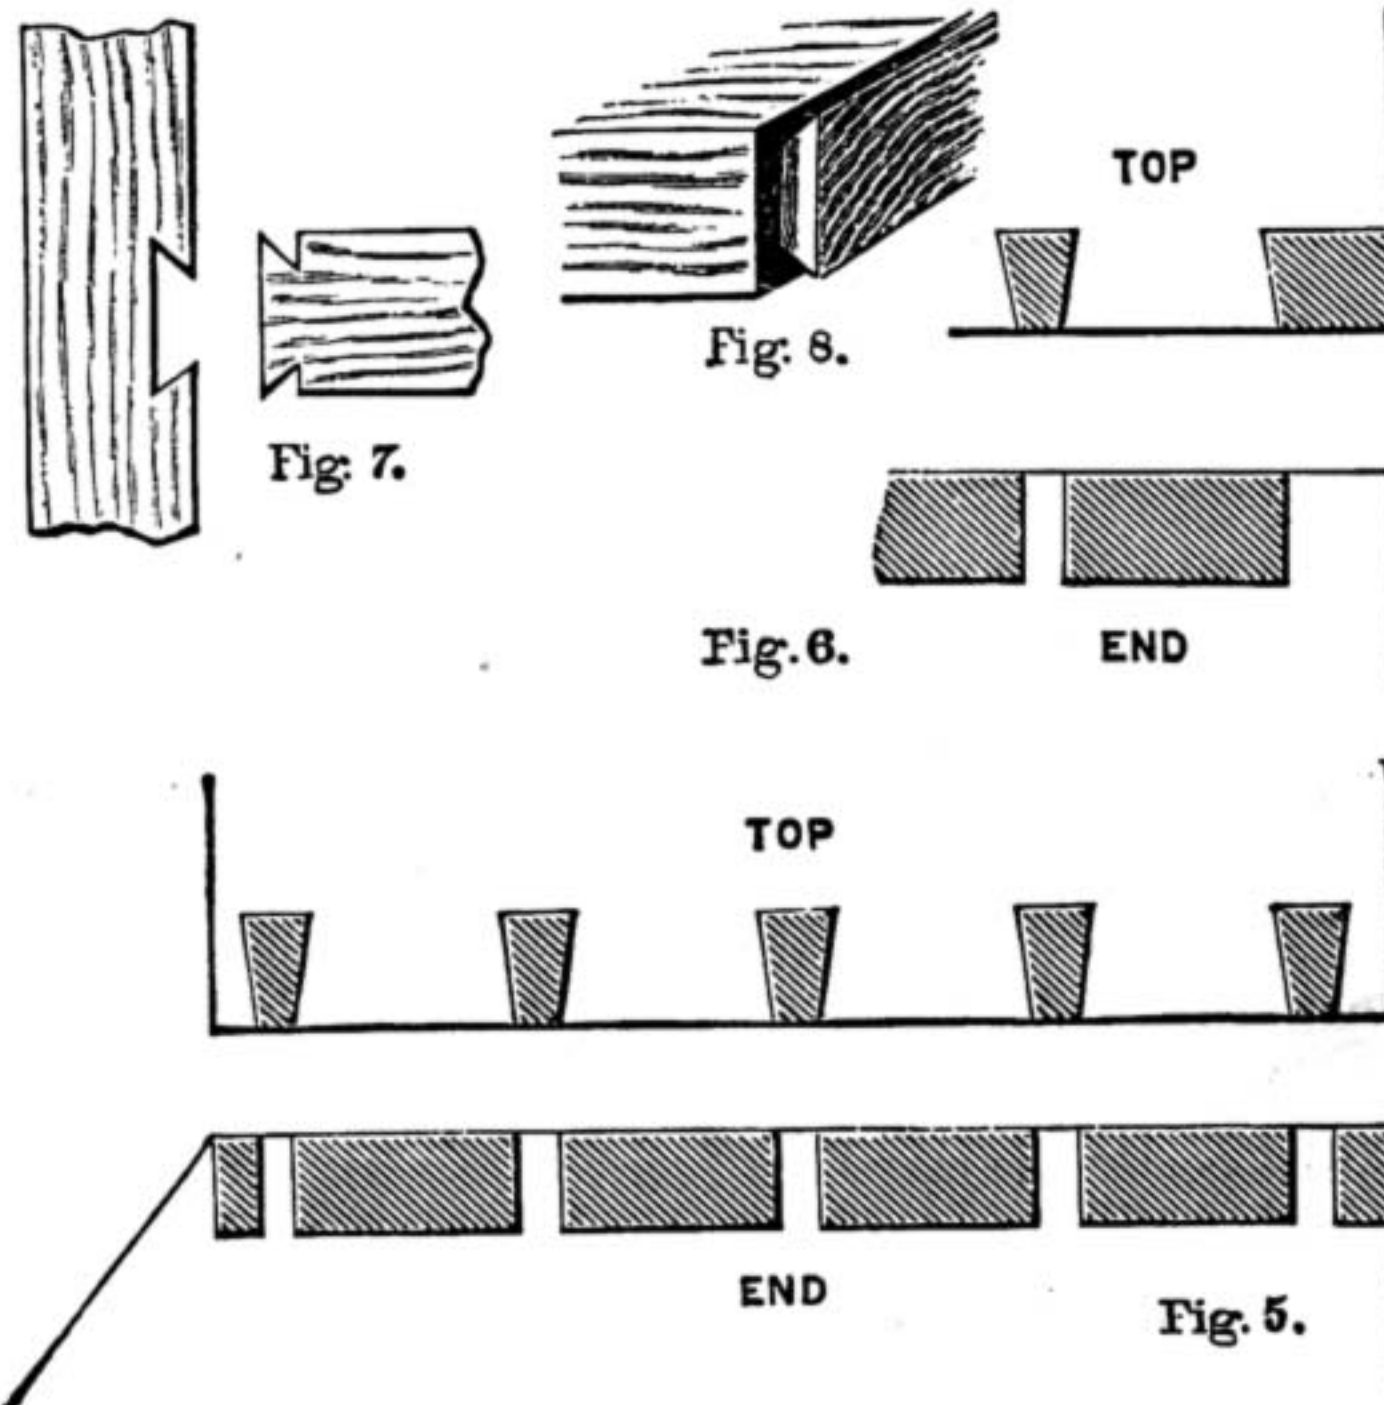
Dovetailed End of Top. Fig. 6.—Ends and Back: Top Corner. Fig. 7.—Joint for Drawer Bearer. Fig. 8.—End for Drawer Bearer.
